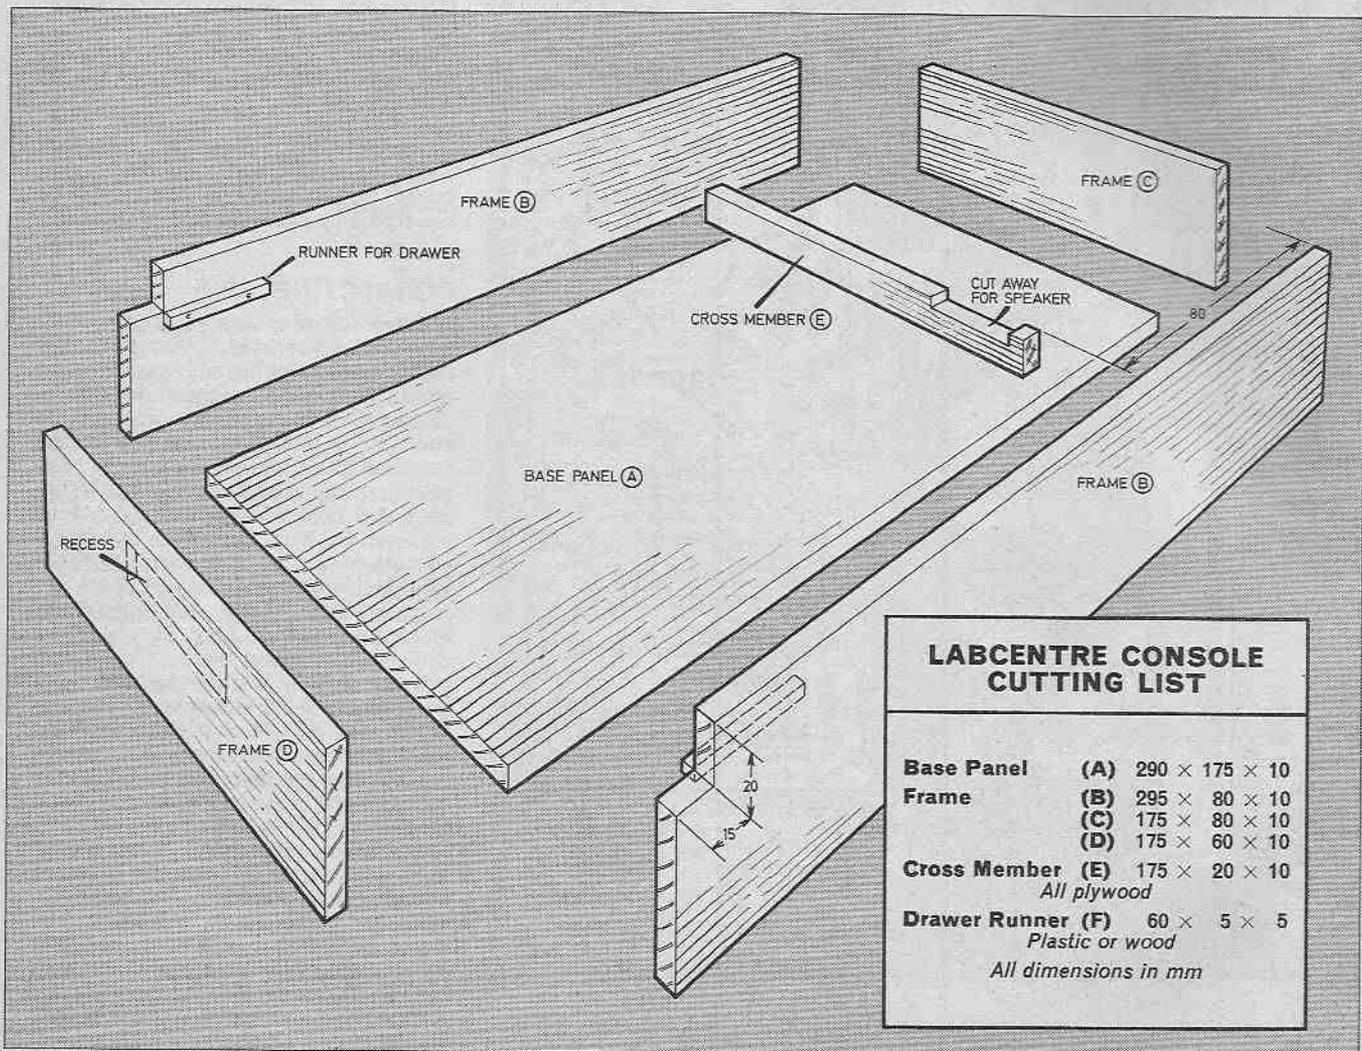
Exploded view of the woodwork construction of the Console with a component drawer.
